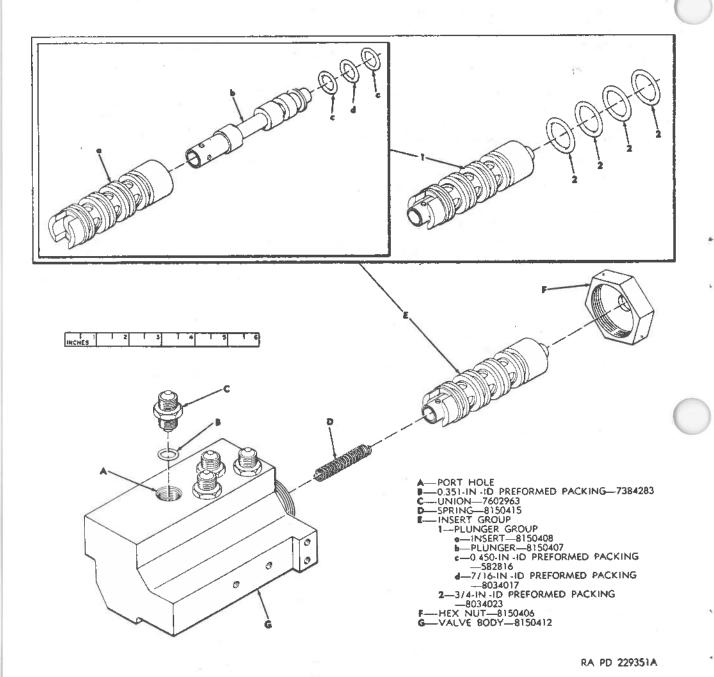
Hydraulic valve assembly 8150411—partially exploded view.
